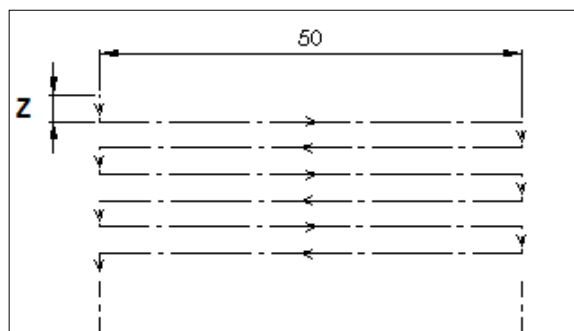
Tool path during incremental forming process. The tool moves linearly back and forth across the sheet while incrementally penetrating according to the vertical step size until complete fracture occurs (dimensions in mm).
